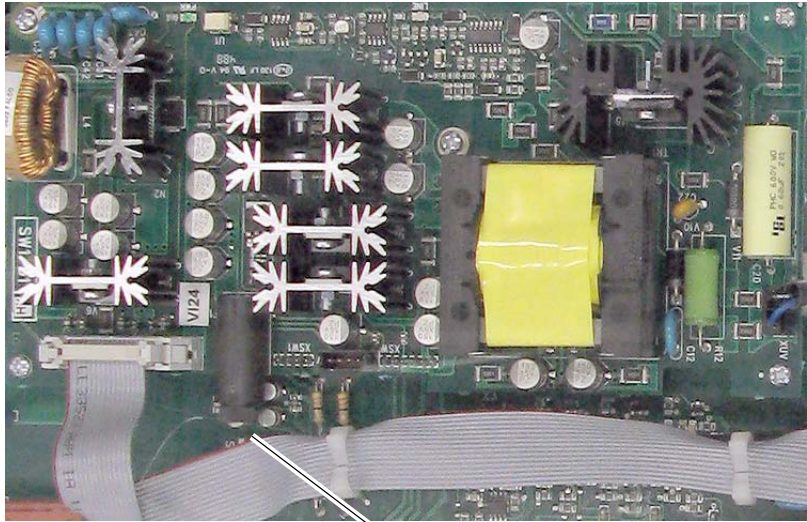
Frame C Switching Power Supply Circuit Board Fuse Location
